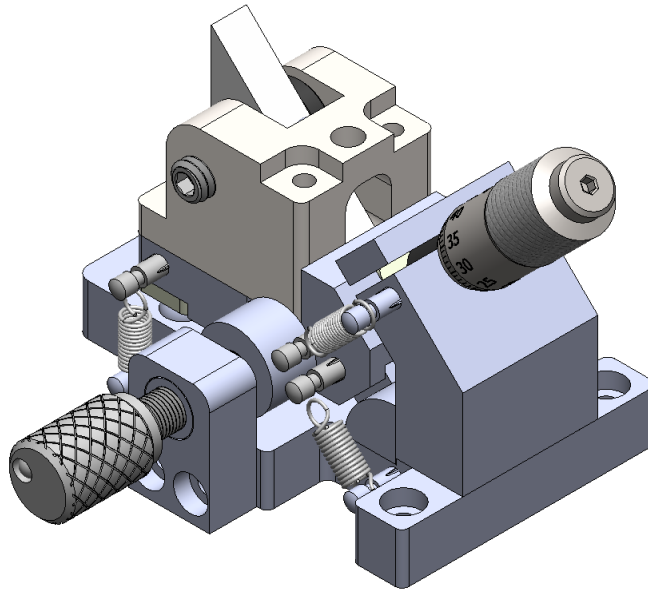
Detail of kinematic goniometer and knife edge adjustment module. A magnetically preloaded screw allows for edge translation to use different parts of the cutting edge. The other contacts are preloaded with extension springs. This design is good for a range of approximately 10 deg and is primarily limited by friction.
